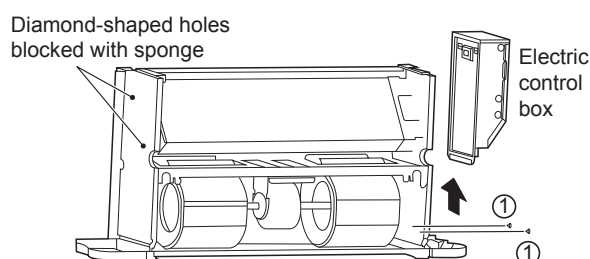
Removing the electric control box and blocking the diamond-shaped holes
